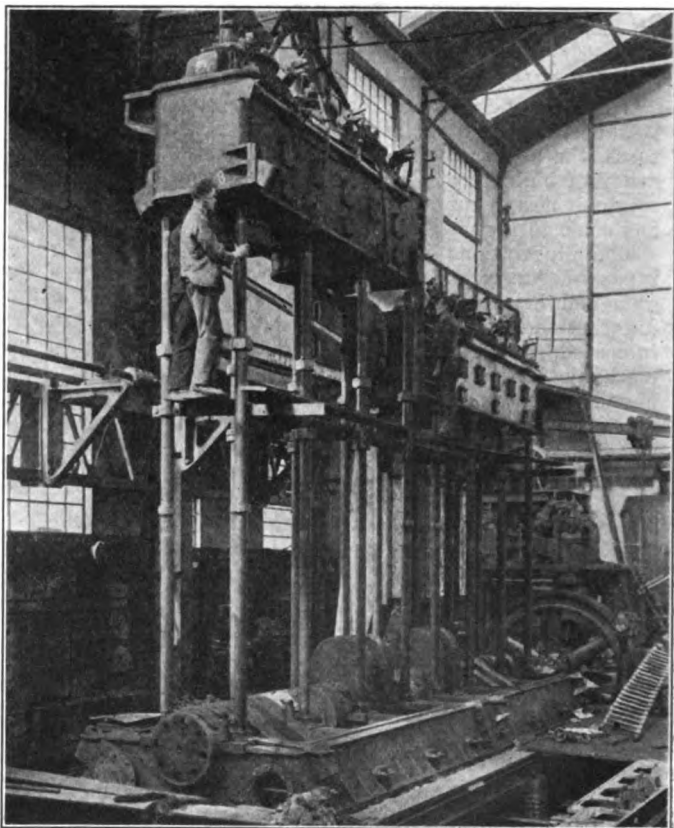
THE WERKSPOOR MARINE DIESEL ENGINE IN COURSE OF CONSTRUCTION
